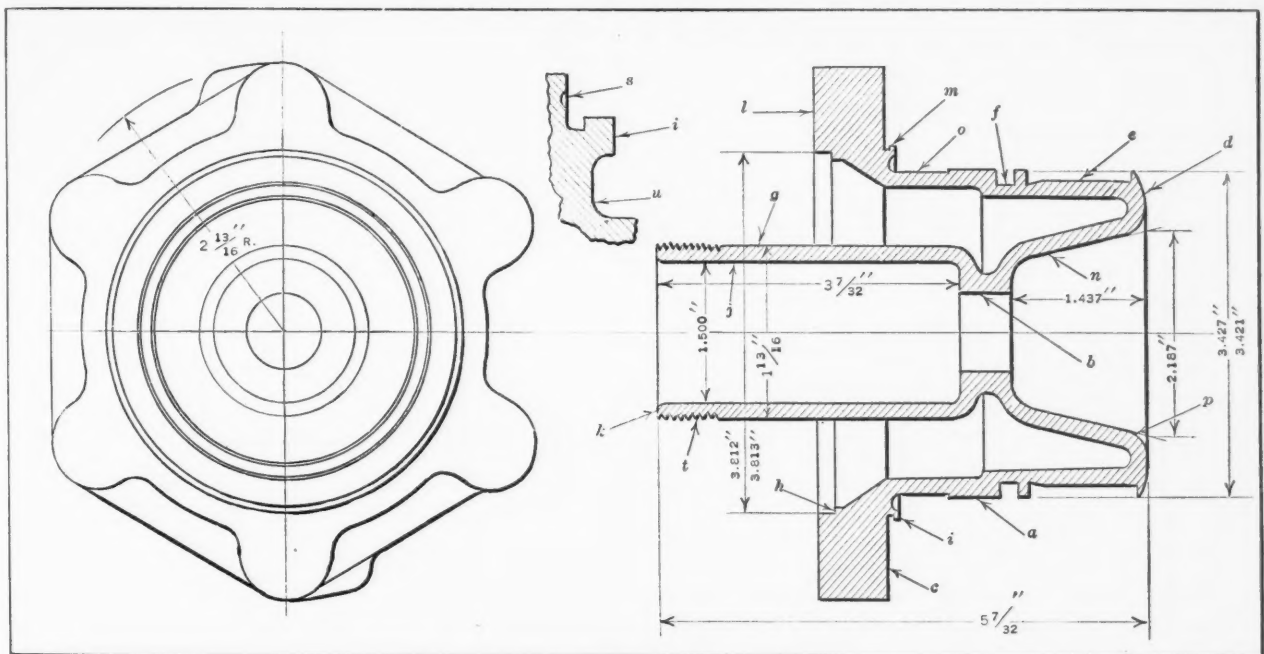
Design of the Cylinder Head Used on Yellow Sleeve-Valve Automobile Engines
